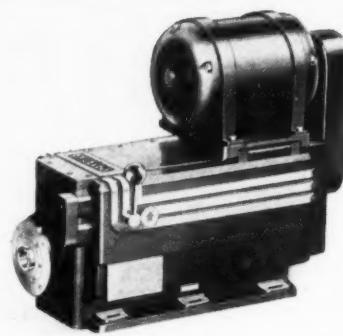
Ex-Cell-O Hydraulic Power Unit of Improved Design
